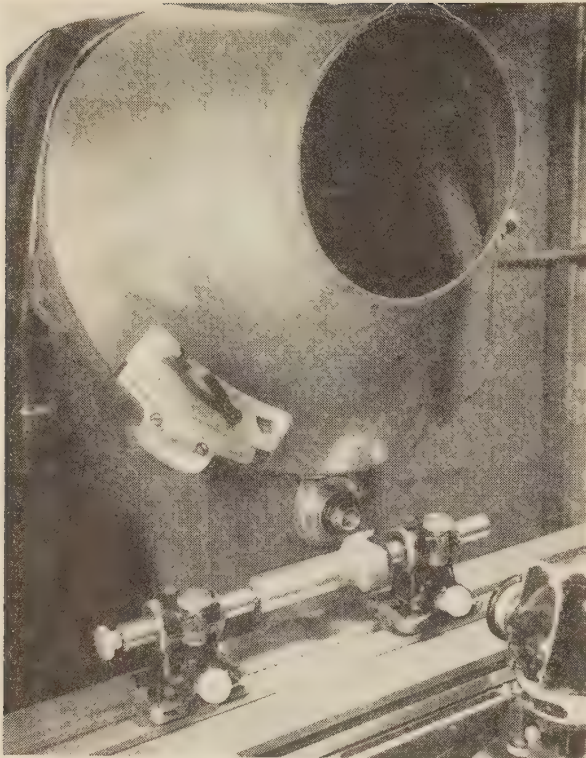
JONES AND LAMSON OPTICAL COMPARATOR USED FOR INVESTIGATION AND RECORDING OF TIP FAILURE
